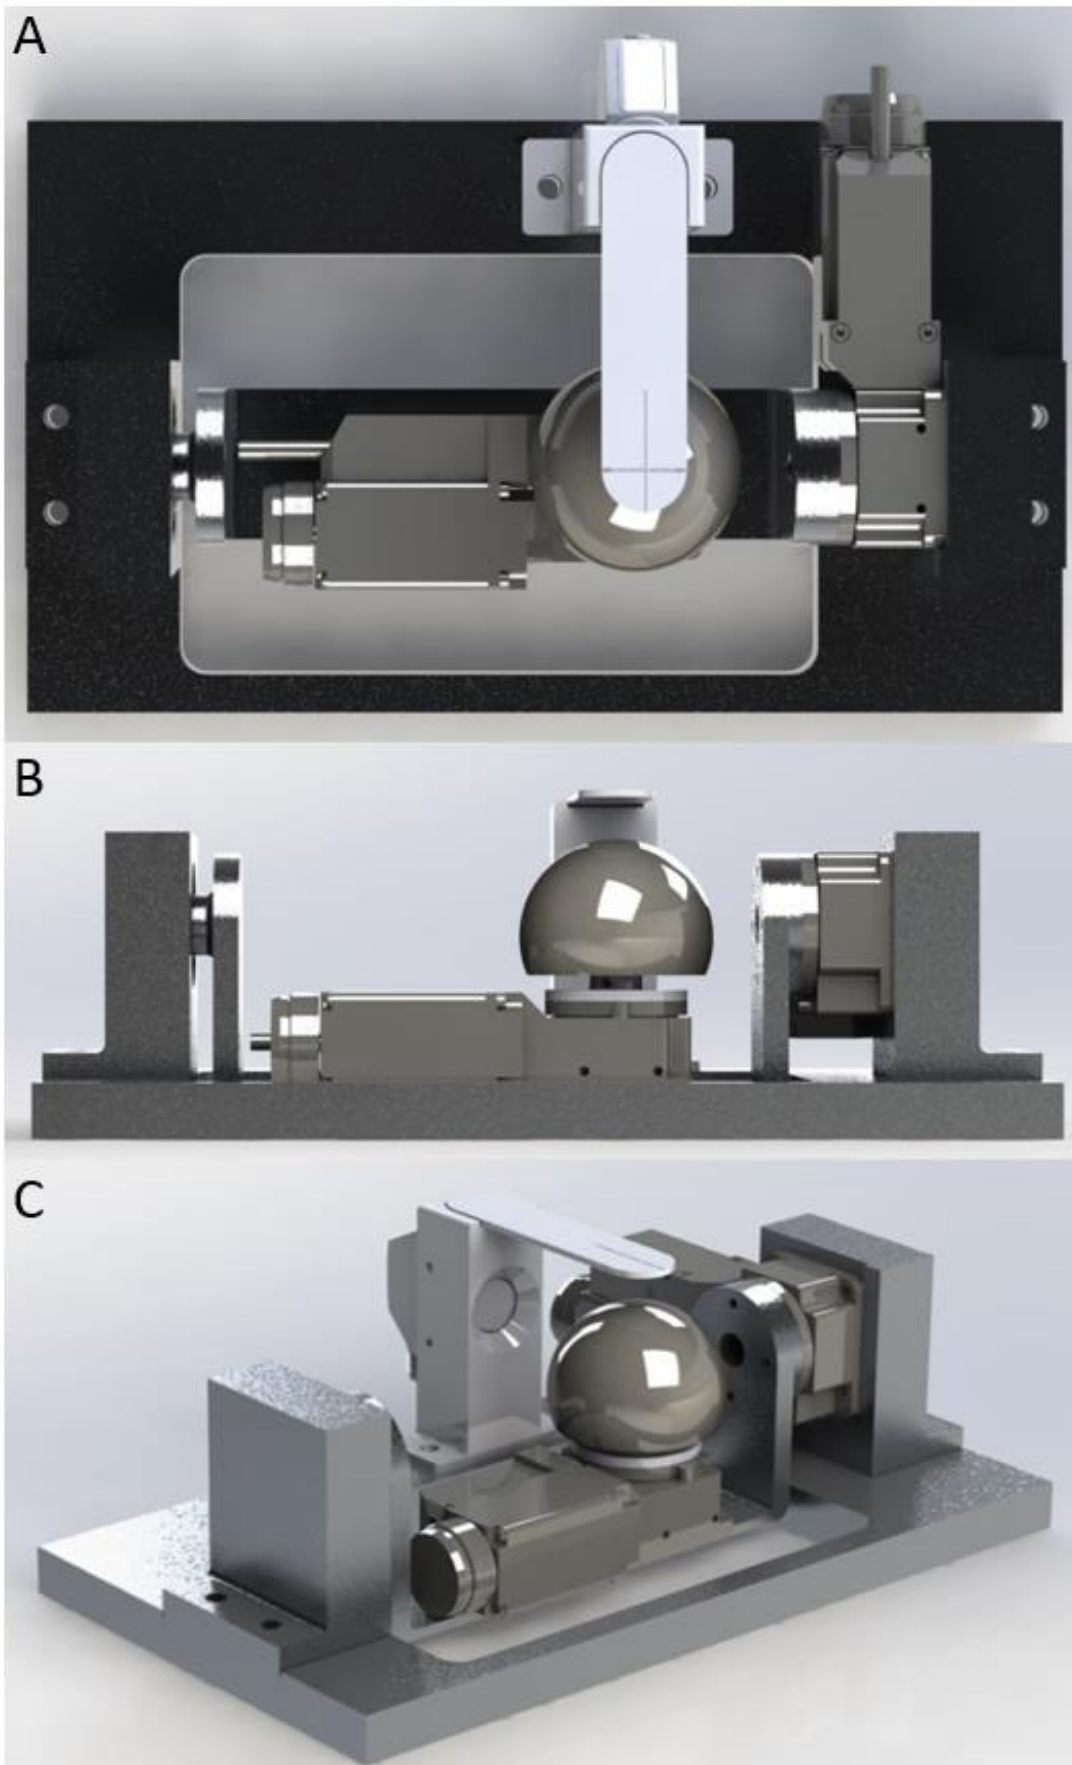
Rendered CAD images of the final fixture system design. A: Top view, B: Side view, C: Isometric view.
